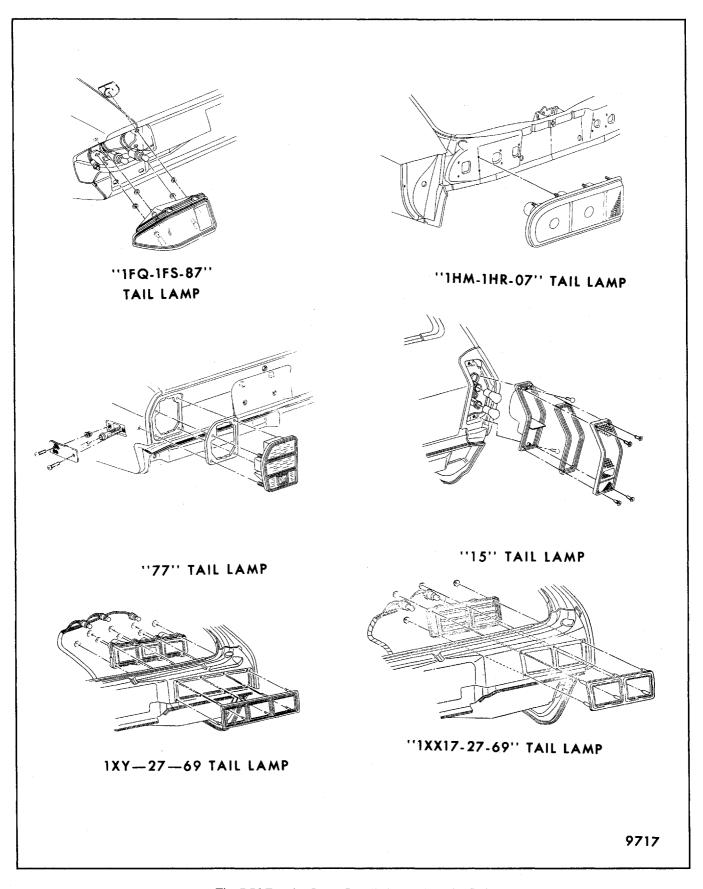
Exterior Lamp Installation - Chevrolet Styles
